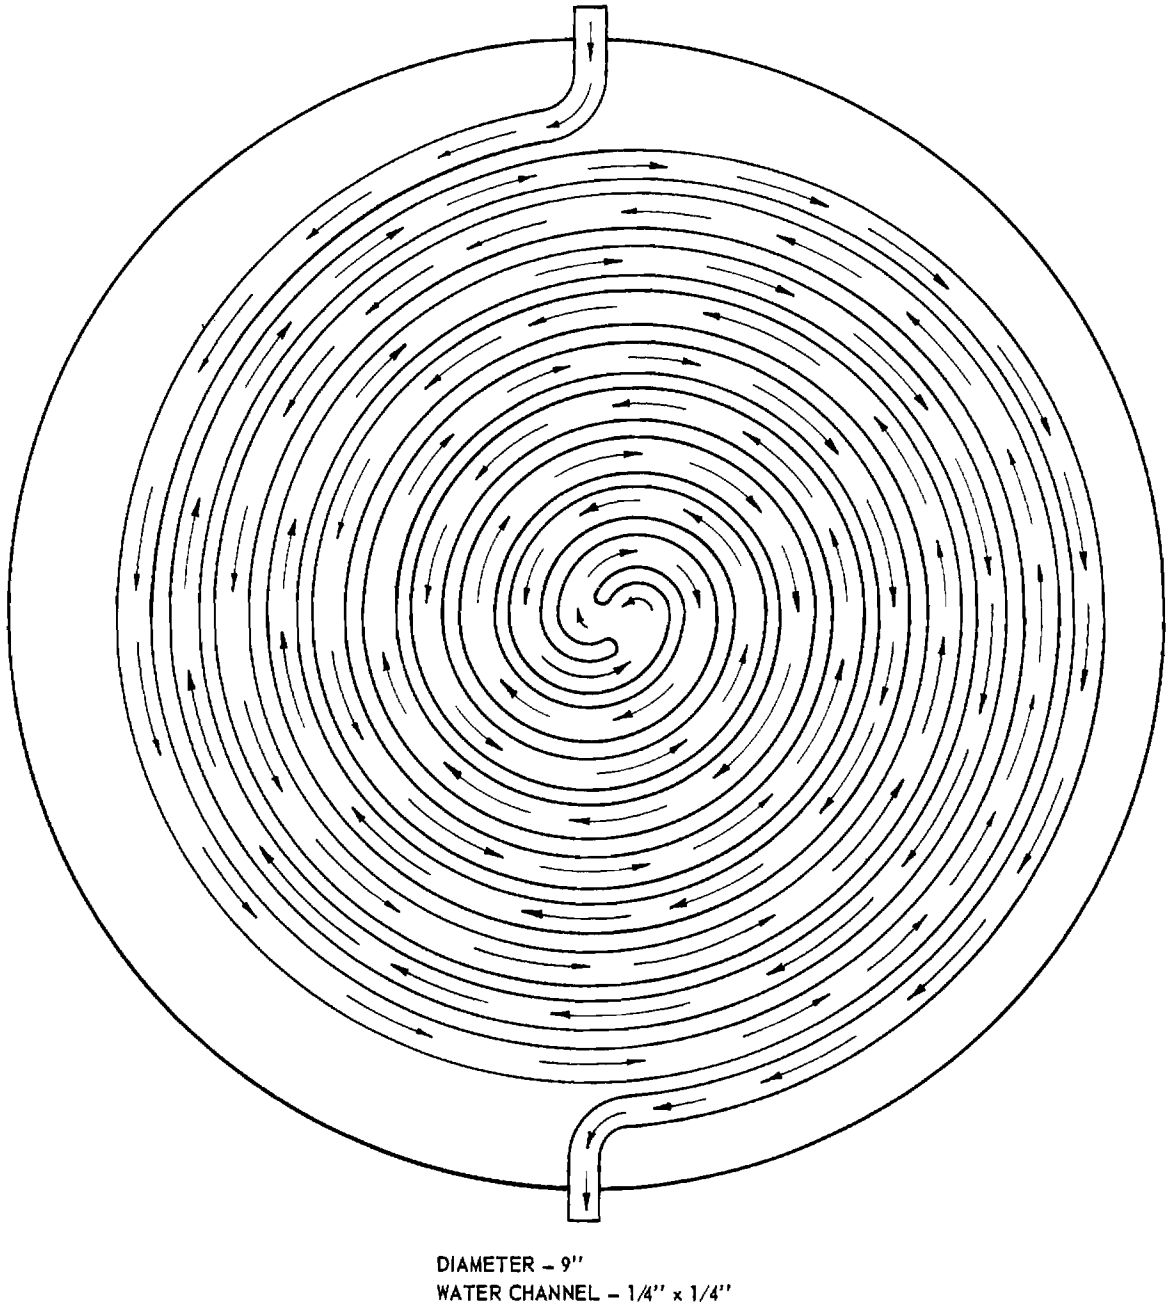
Top View of Cooling Plate with Cover and Gasket Removed.
